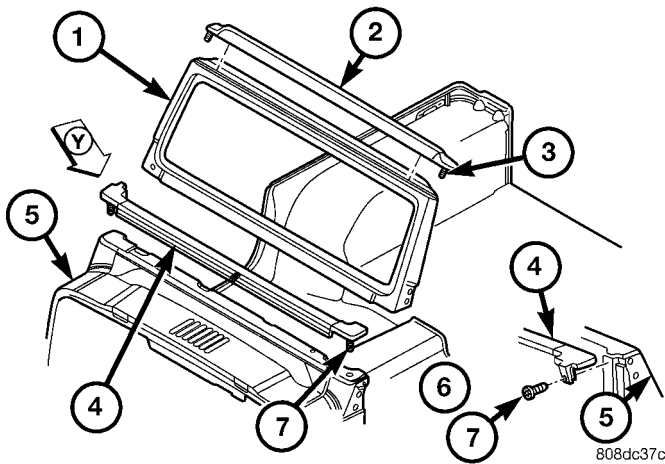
WINDSHIELD FRAME WEATHERSTRIP
